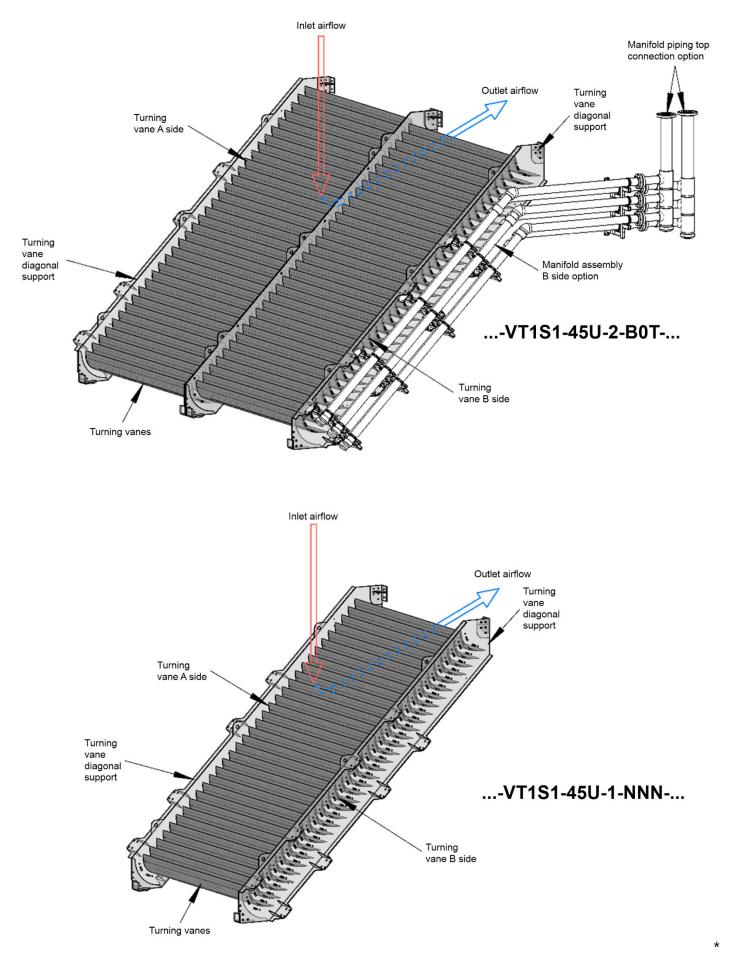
Turning section diagonal assembly (TTE-TSDA): 2-component example – manifold on B-side. 1 - component example – without manifolds. A bottom piping connection is also possible.
